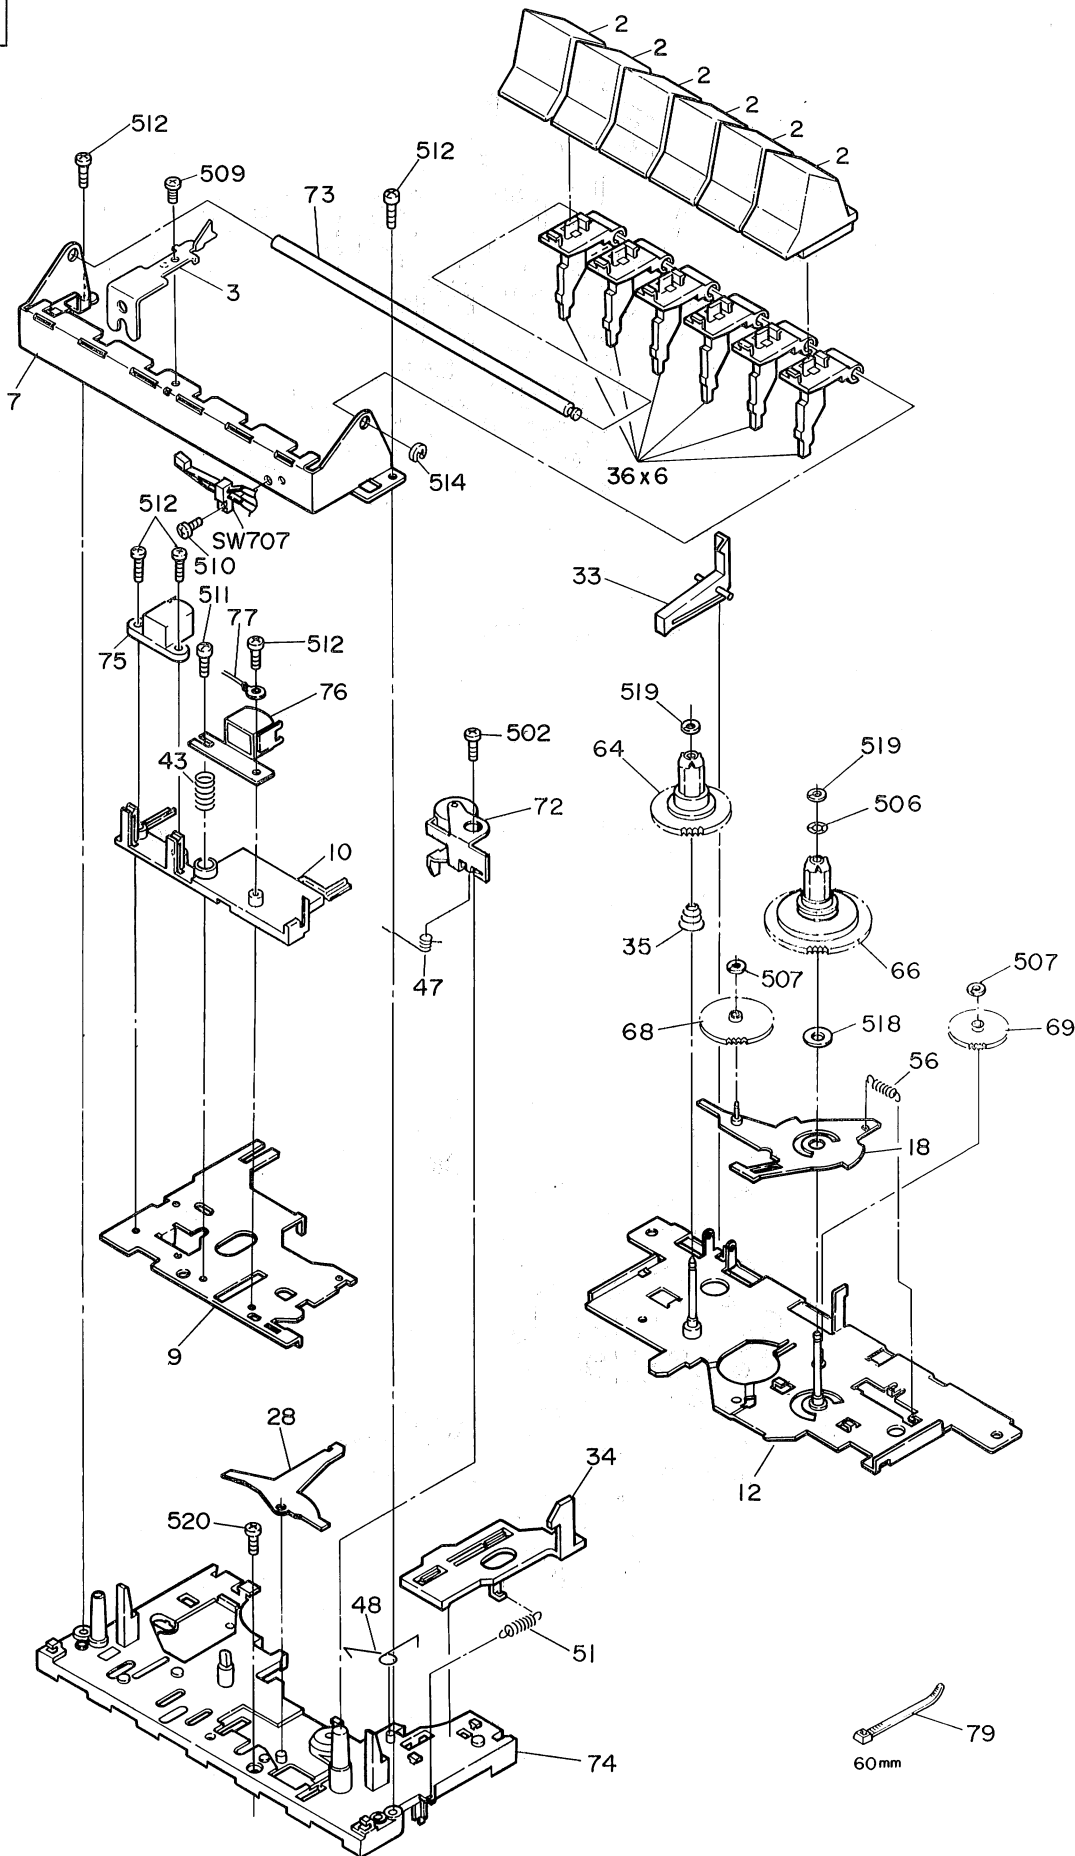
TAPE MECHANISM EXPLODED VIEW (3/4)
